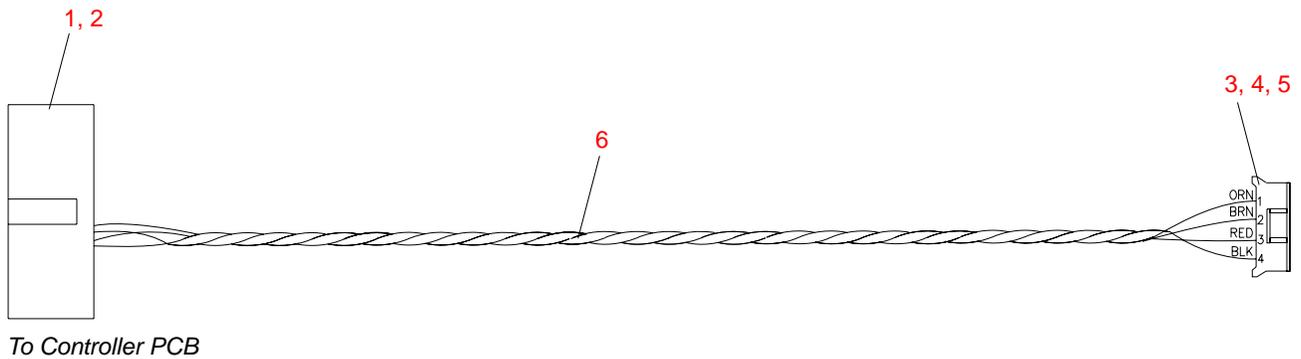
VLX Wash Zoom Motors Cable Assembly
